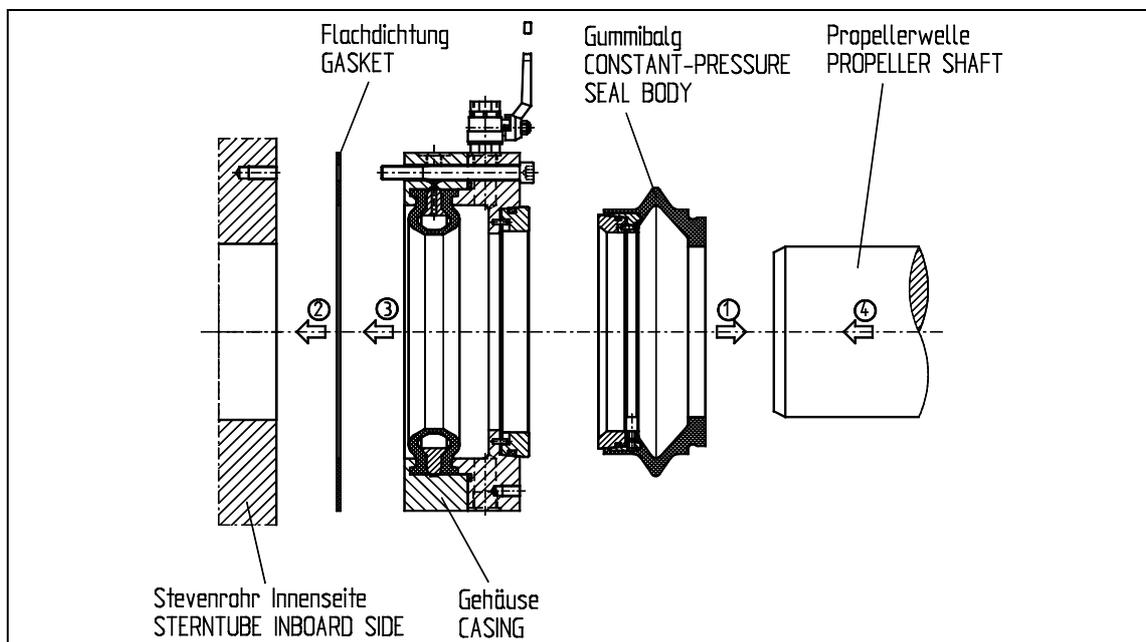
Fitting the Simplan Shaft fitted from inboard
